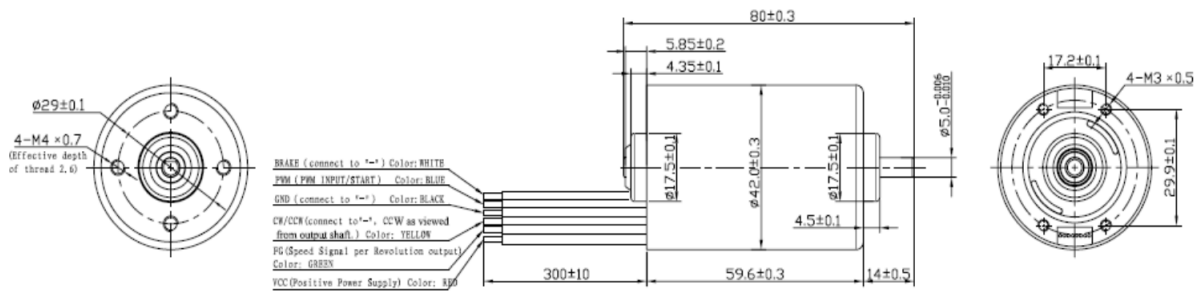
Thrustmaster T300 RS Motor Technical Drawing
